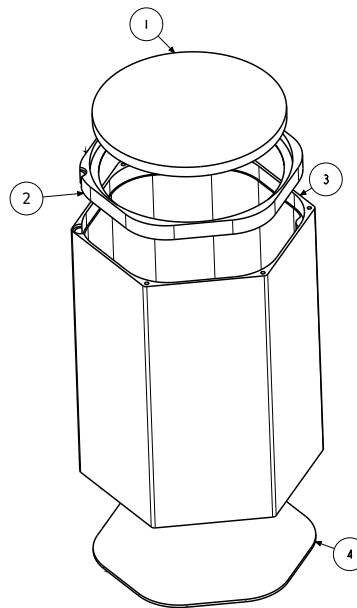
Exploded view of the NEDA cell showing 1) glass window, 2) top flange, 3) cylinder and 4) bottom lid.
